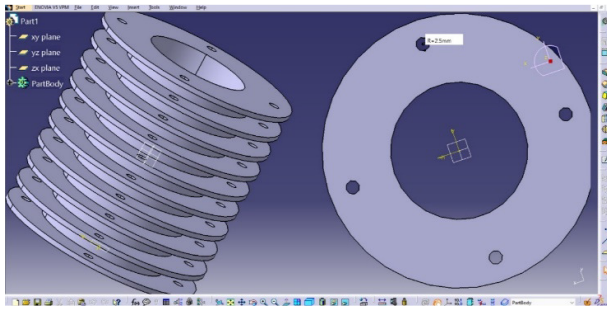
Geometric dimension of the cylindrical block having circular fins with 5 mm circular hole
